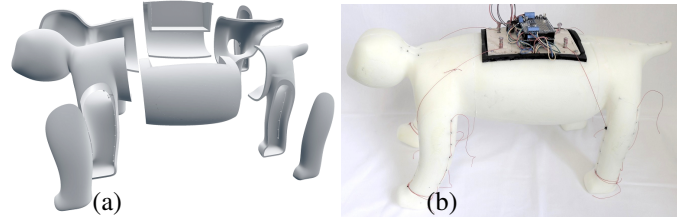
Our four-legged soft robot: (a) designed mould pieces and (b) final result.
